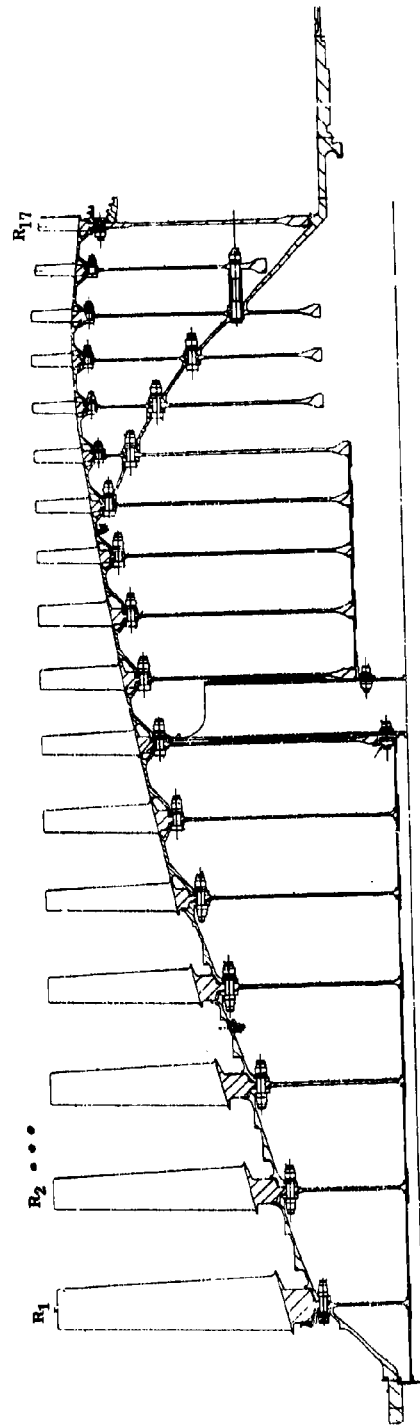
COMPRESSOR ROTOR-DOWEL BOLT CONSTRUCTION. J79 Compressor Rotor Showing Dowel Bolt Construction Which, With Modifications, Has Been Adopted for GE4
